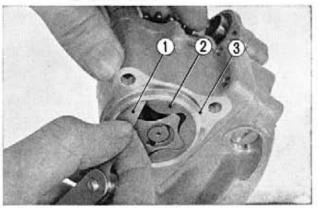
① Thickness gauge ③ Pump body ② Outer rotor
